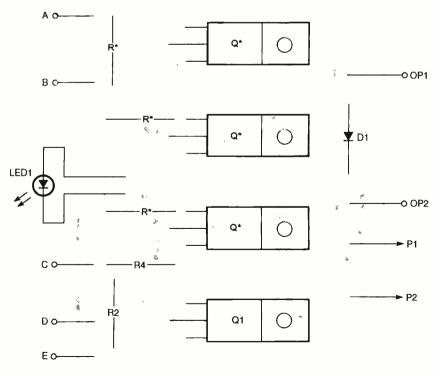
Potentiometer R1 can be a board-mounted trimmer potentiometer or a panelmounted unit. If R1 is to be a panel-mounted- unit, solder three wires to the appropriate PC pads of the main board and connect their other ends to R1. You'll also need to attach five wires to the appropriate points on the main printed-circuit board to make the inter-board connections.
